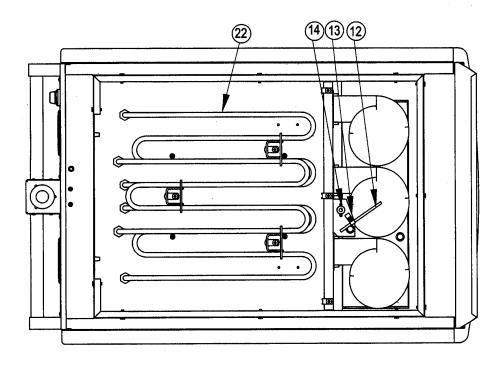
; Bottom of Hot Unit, Cover Removed (For parts description, refer to page 10)
